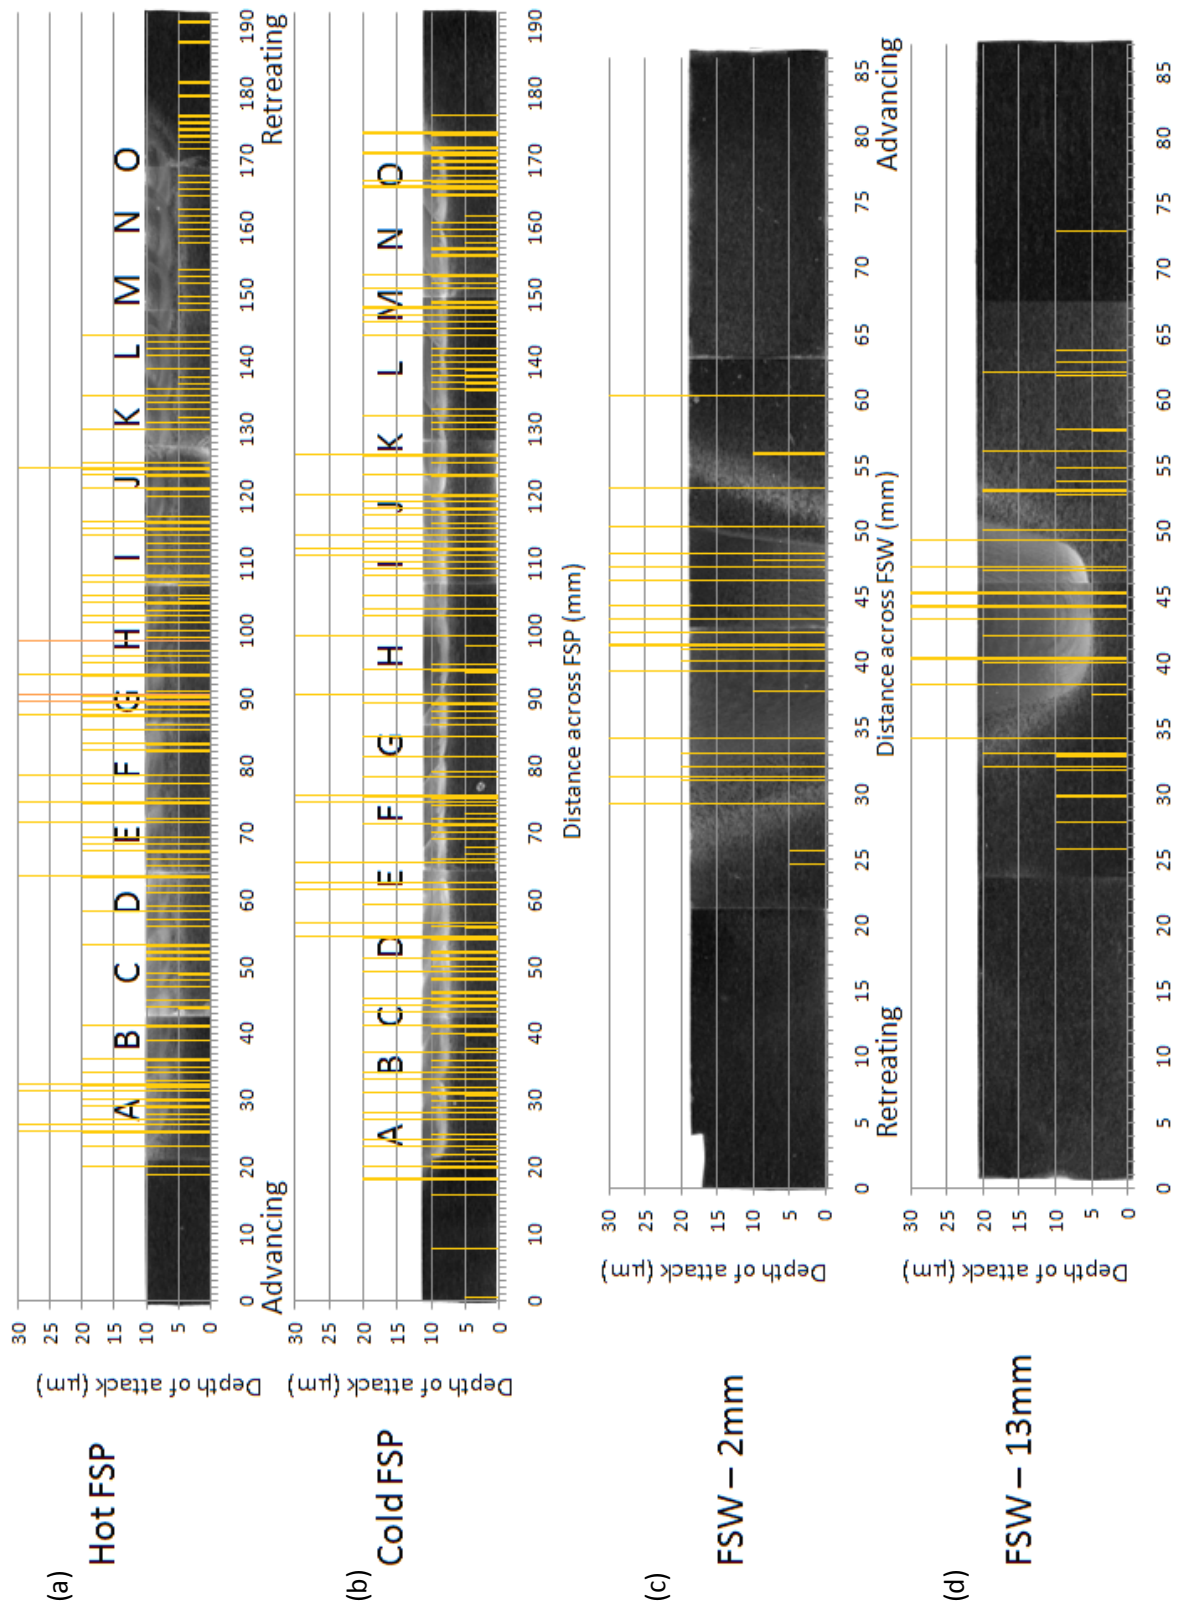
A series of optical macrographs with corrosion data showing pitting with IGC attack locations and depths across (a) hot FSP, (b) cold FSP, (c) FSW at 2 mm deep, and (d) FSW at 13 mm deep
